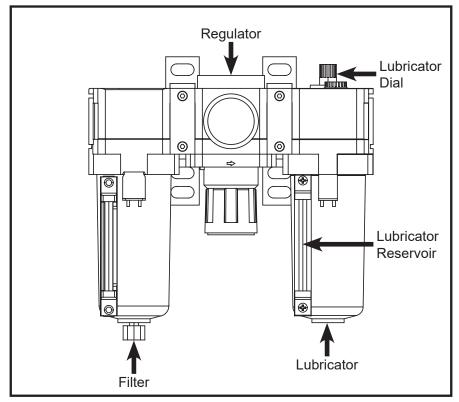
Martin® Gen 4 Railcar Opener Filter, Regulator, and Lubricator
